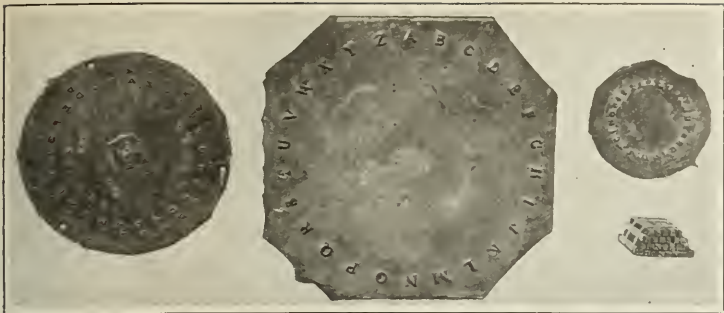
Models used in making Lettering Punches and a Finished Set of Punches
